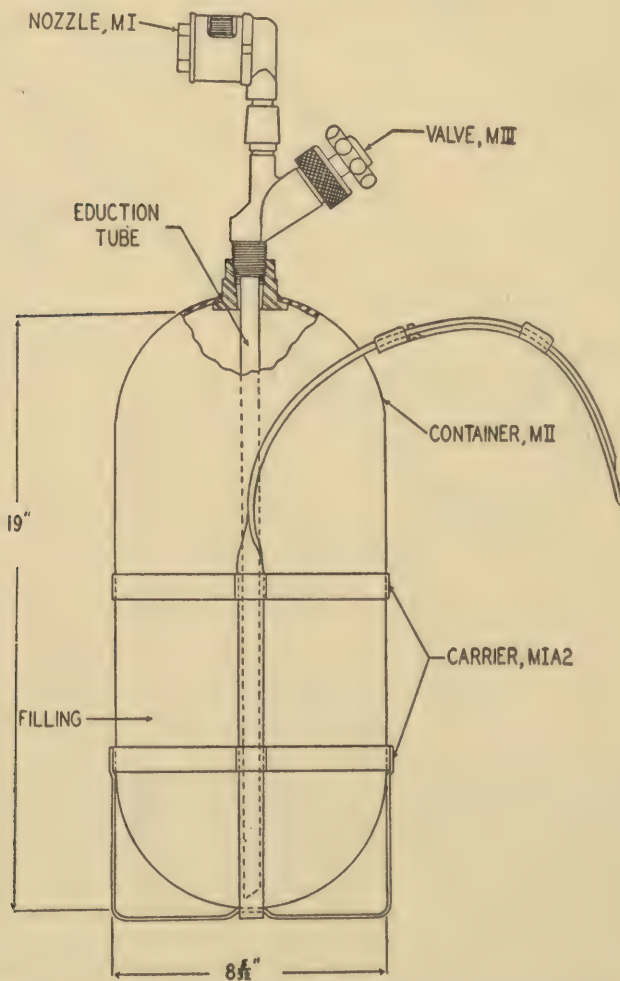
Portable Cylinder with Nozzle and Firing Device,
